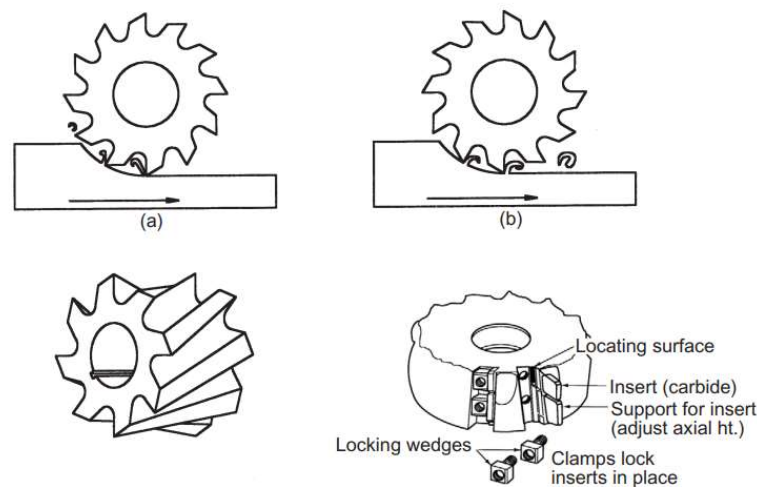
Conventional (up) milling (a), climb (down) milling (b), peripheral milling, and face milling
